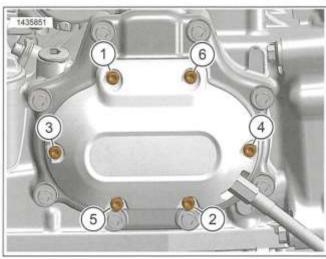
Clutch Release Cover Torque Sequence (Short Screws at Locations 1 and 6)
